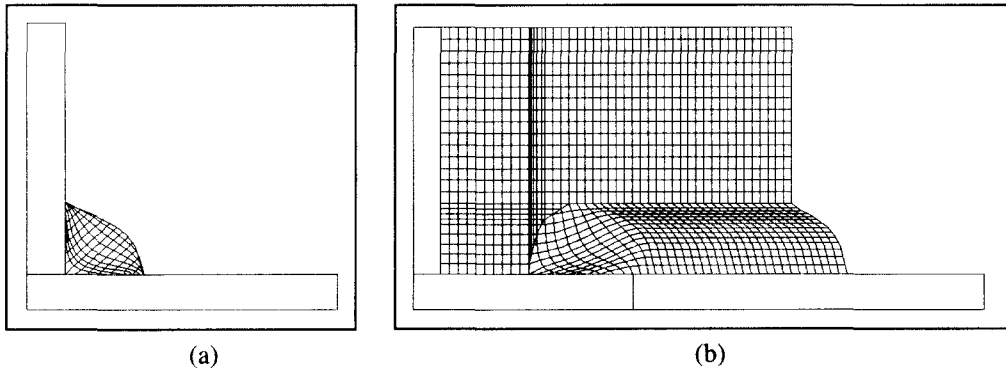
Calculated weld bead (250A, 29V, 7mm/sec)
